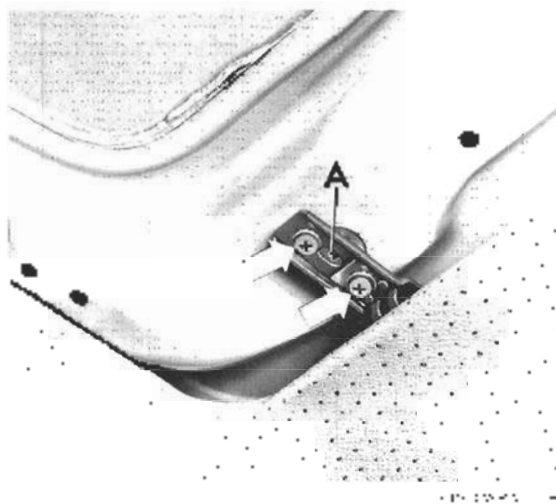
Front guide. The arrows indicate the Phillips head screws with spring washers. The adjusting screw is at A.
